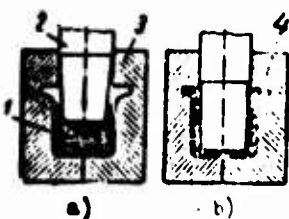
Diagram of stamping of metal from liquid state; a) at beginning of pressing; b) after pressing; 1 - molten metal; 2 - ram; 3 - die; 4 - ready casting.
